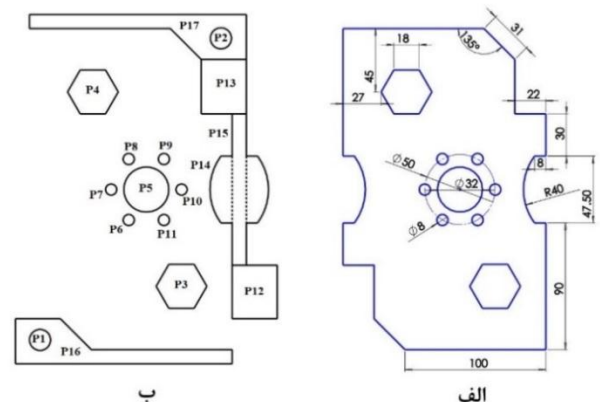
a) Sheet metal workpiece of example 1 b) Operating punches for example 1
